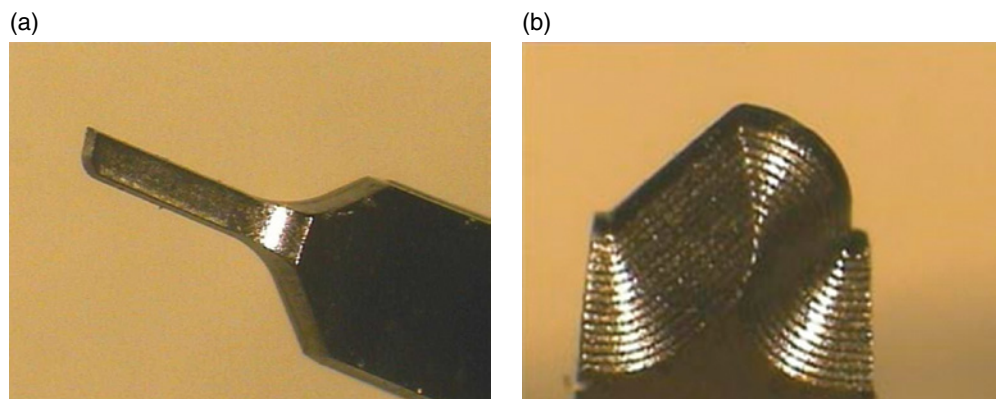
CVD diamond (a) parabolic shape micro milling tool and (b) 500µm diameter ball end micro milling tool [29, courtesy of Contour Fine Tooling Ltd]. Reproduced with permission from Contour Fine Tooling Ltd.
